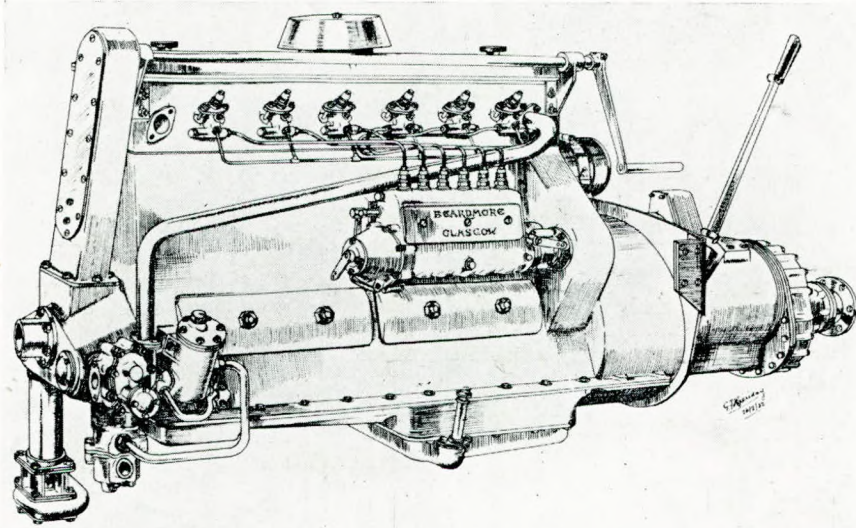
Sketch View of Beardmore 90 b.h.p. Marine Engine.
